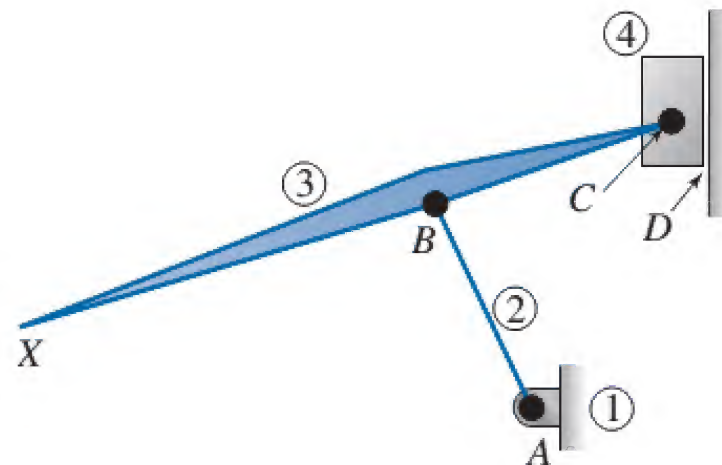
Nosewheel assembly for Example Problem 1.9.
